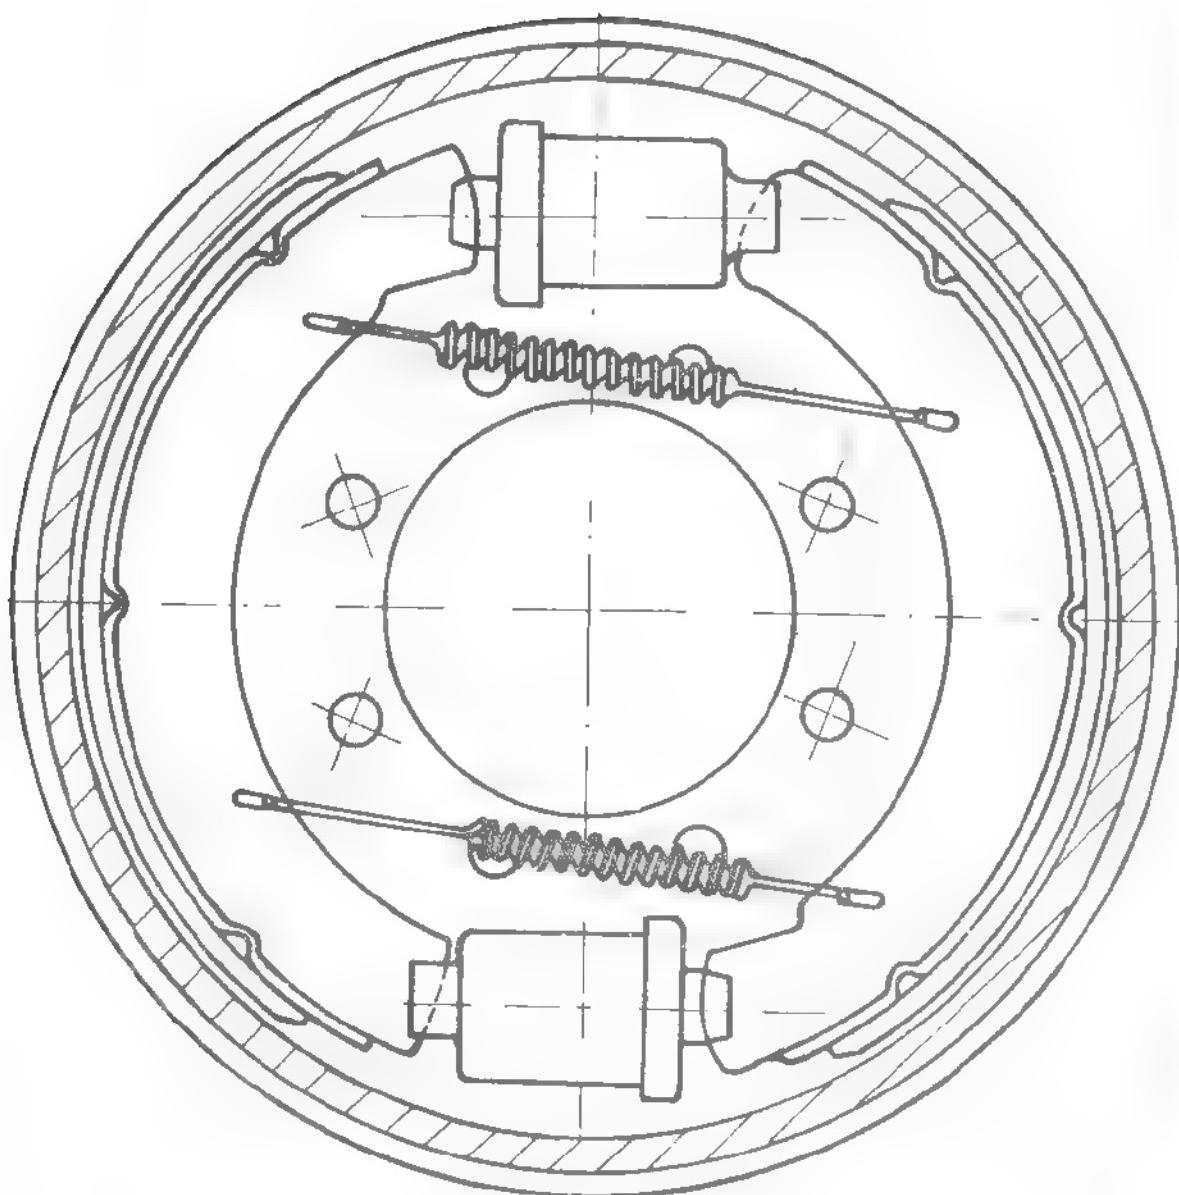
FRONT WHEEL BRAKE ANCHOR PLATE
